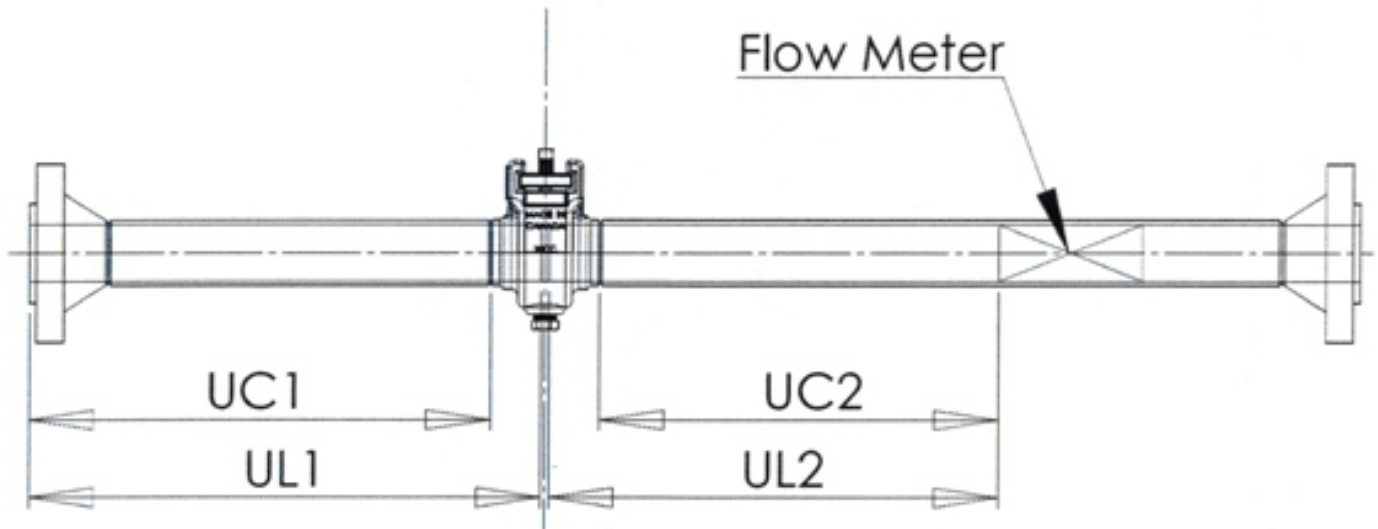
CPA50E plate changer with flange/weld ends /
